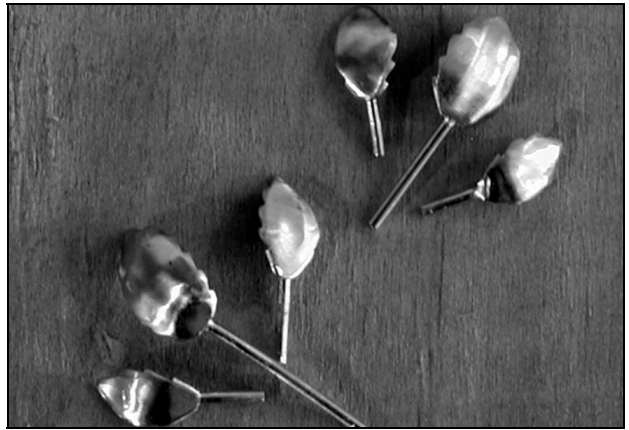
With hard solder (1700 C), 18ga. wire is connected to the base of each leaf.
